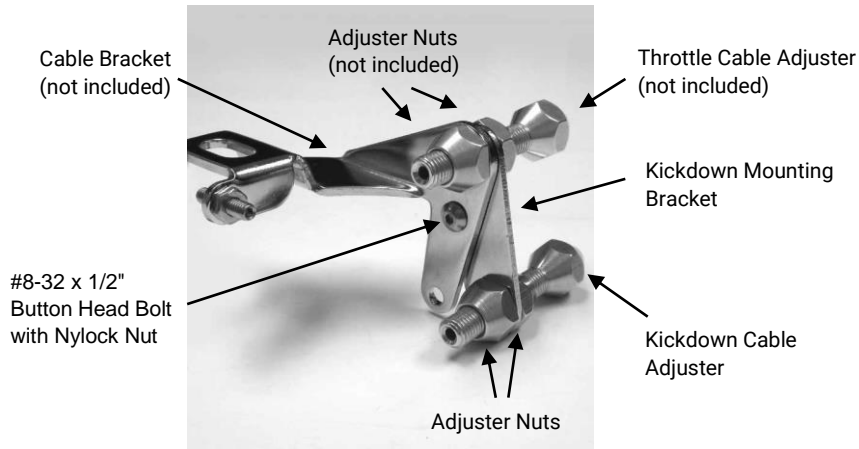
Carburetted Cable Bracket (not included) shown, others are similar
